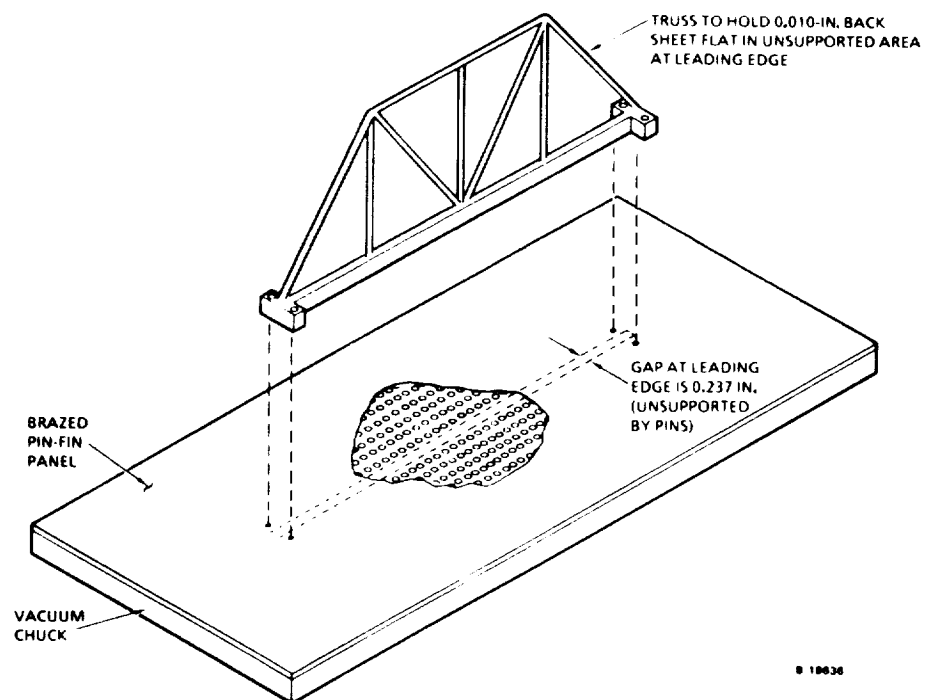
Assembly of Truss to Forward Jacket for Holographic Testing
